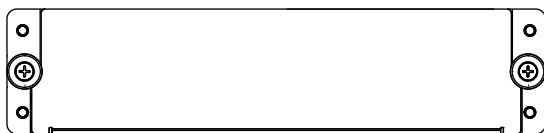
RUGGEDCOM MX5000PN LM Blank
